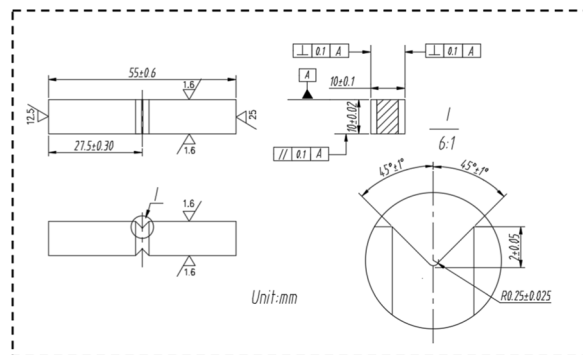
Dimension description of Charpy impact specimen with 2 mm side groove
